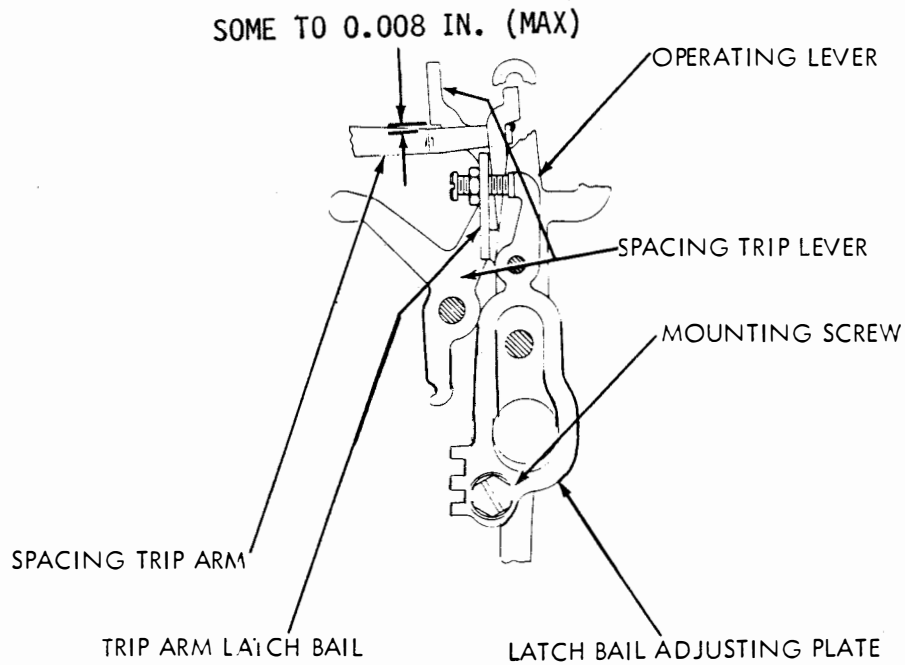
Trip Arm Latch Bail Adjusting Plate, Left View
